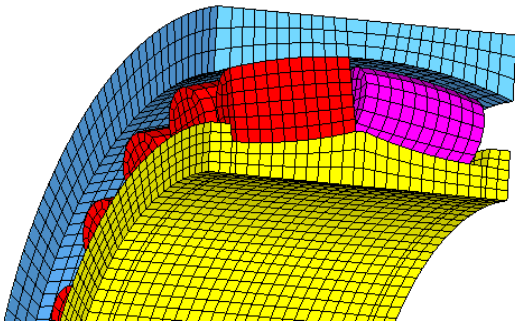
The part of three-dimensional mesh model of the continuous casting roller bearing
